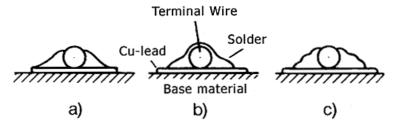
Schematic representing the quality of the soldering. (a) terminal wire badly soldered. (b) PCB badly soldered. (c) terminal wire and PCB badly soldered.
